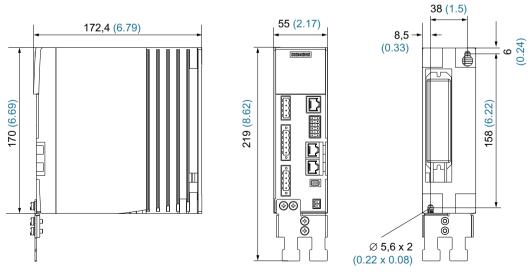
Dimension drawing SINAMICS S210 FSB, 1 AC, dimensions in mm (inch)
